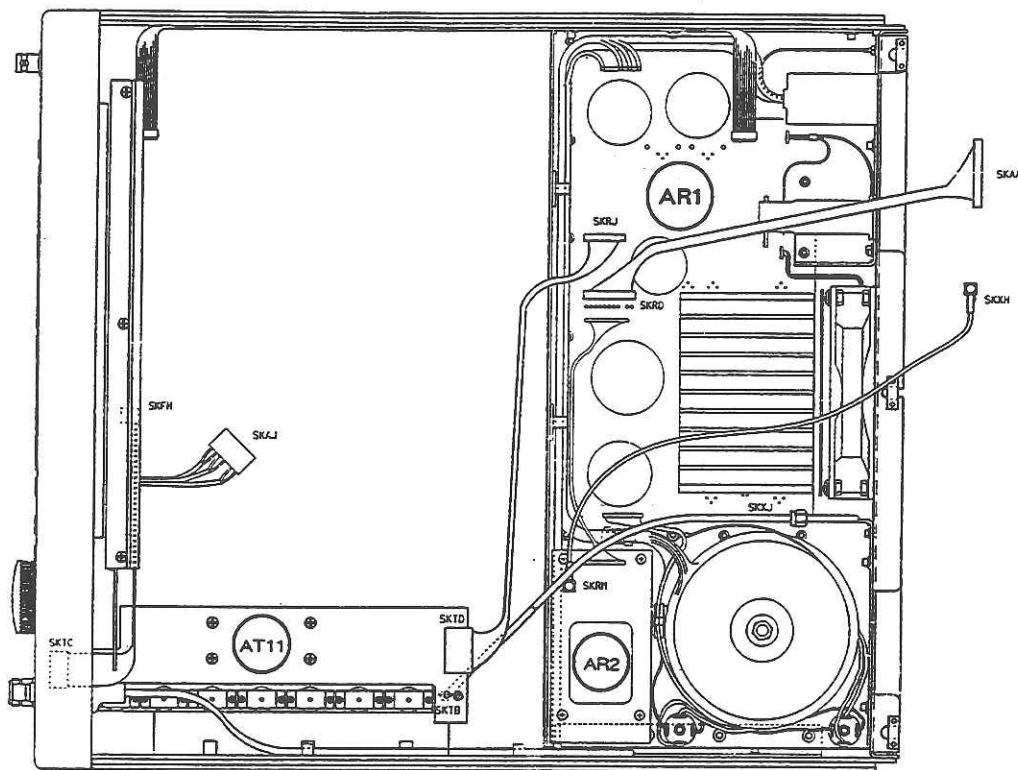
Instrument from above with RF tray removed showing locations of boards and connectors
